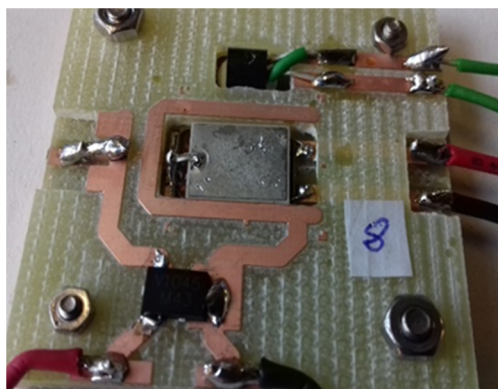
The resulting bottom soldered TEM within a GEN VII Receiver
